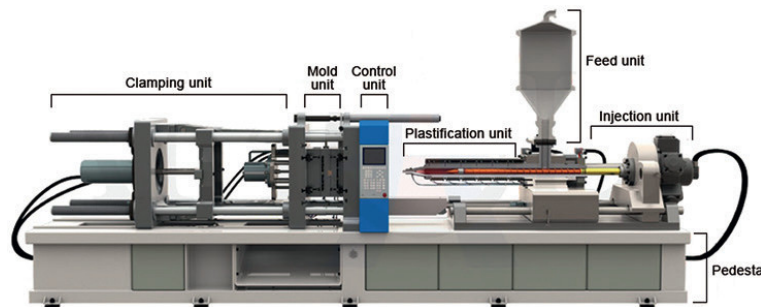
Injection Molding Machine. Reproduced from [5].
